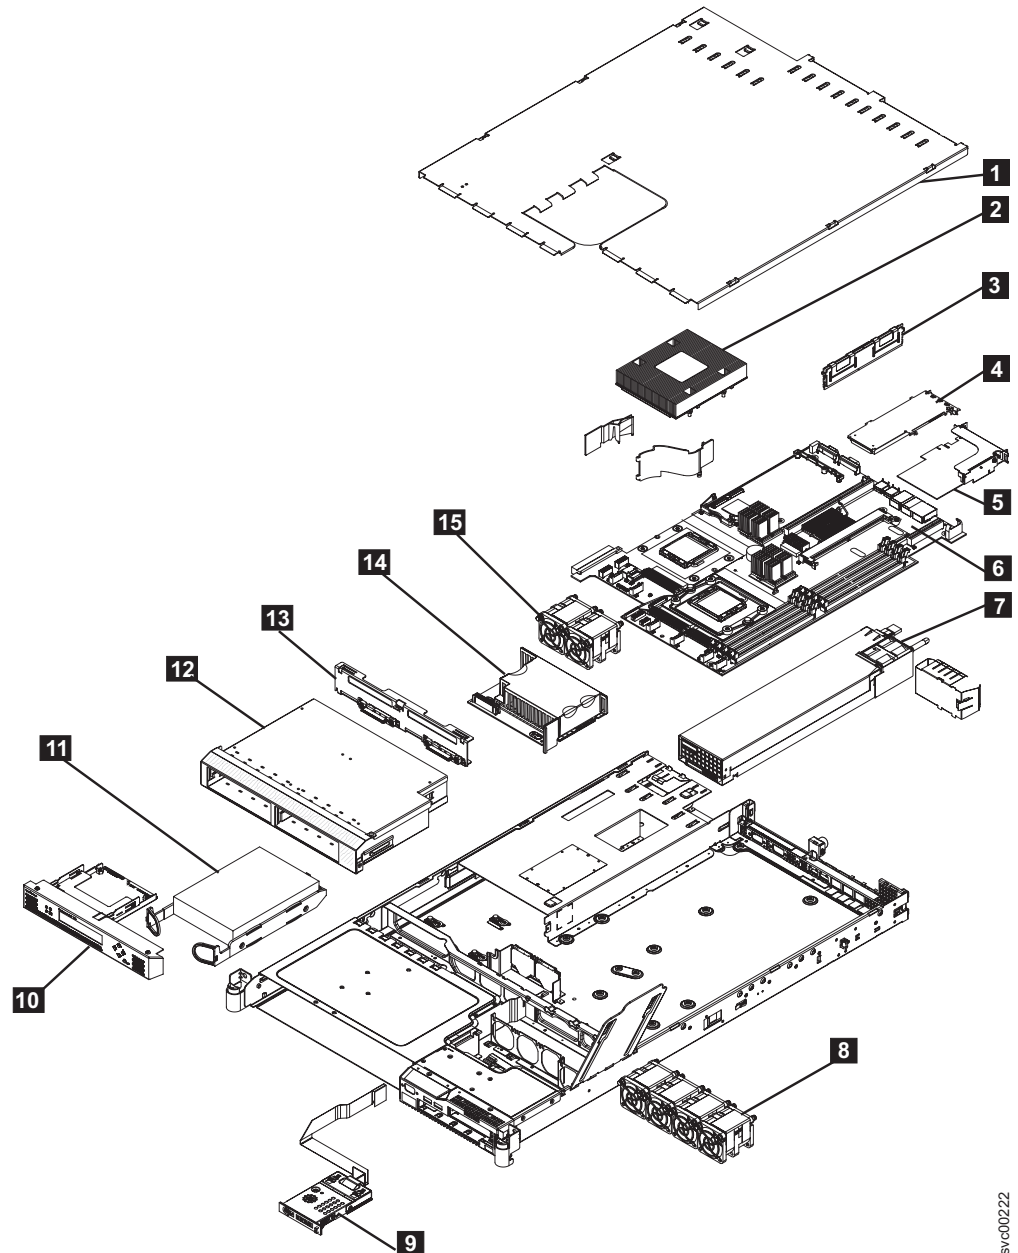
Exploded view of the SAN Volume Controller 2145-8G4 node
